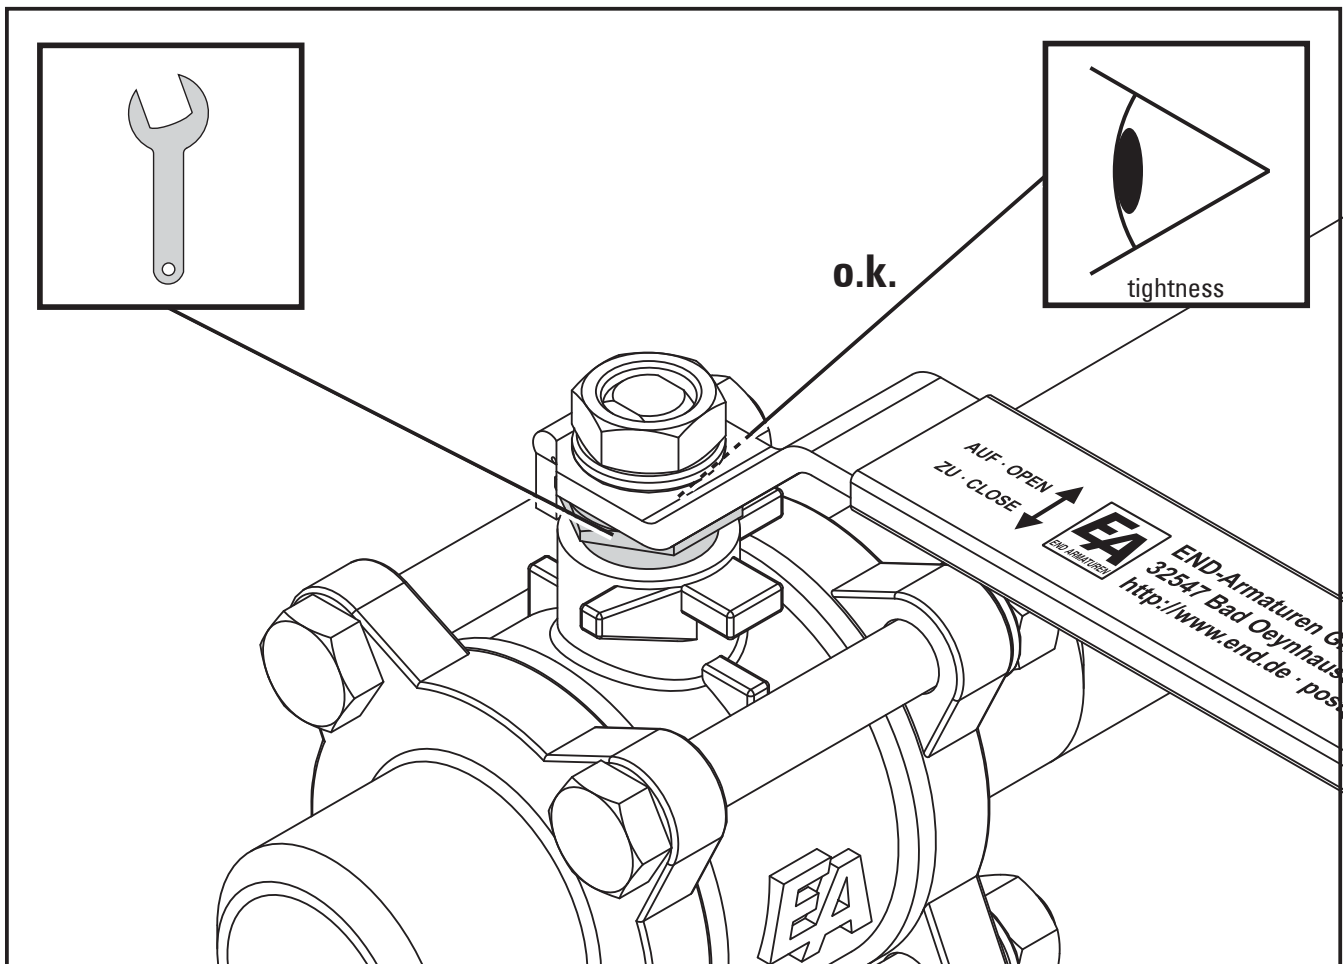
ball valves, readjusting of the gland (Fig.: Art. ZE311064)
